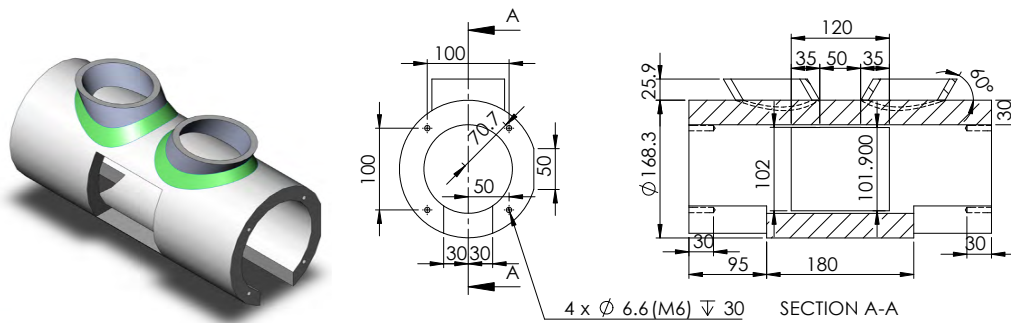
Geometry of specimen used for the ND measurement (S7-355). The weld lines are only shown in the 3D rendering.
